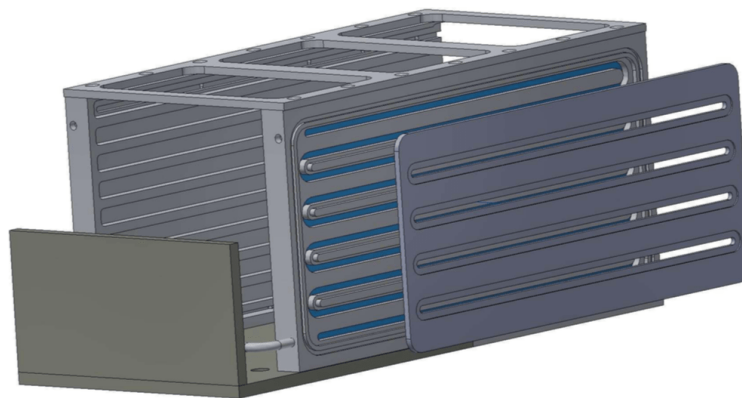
View of the internal cooling channel in a crate CAD model.
